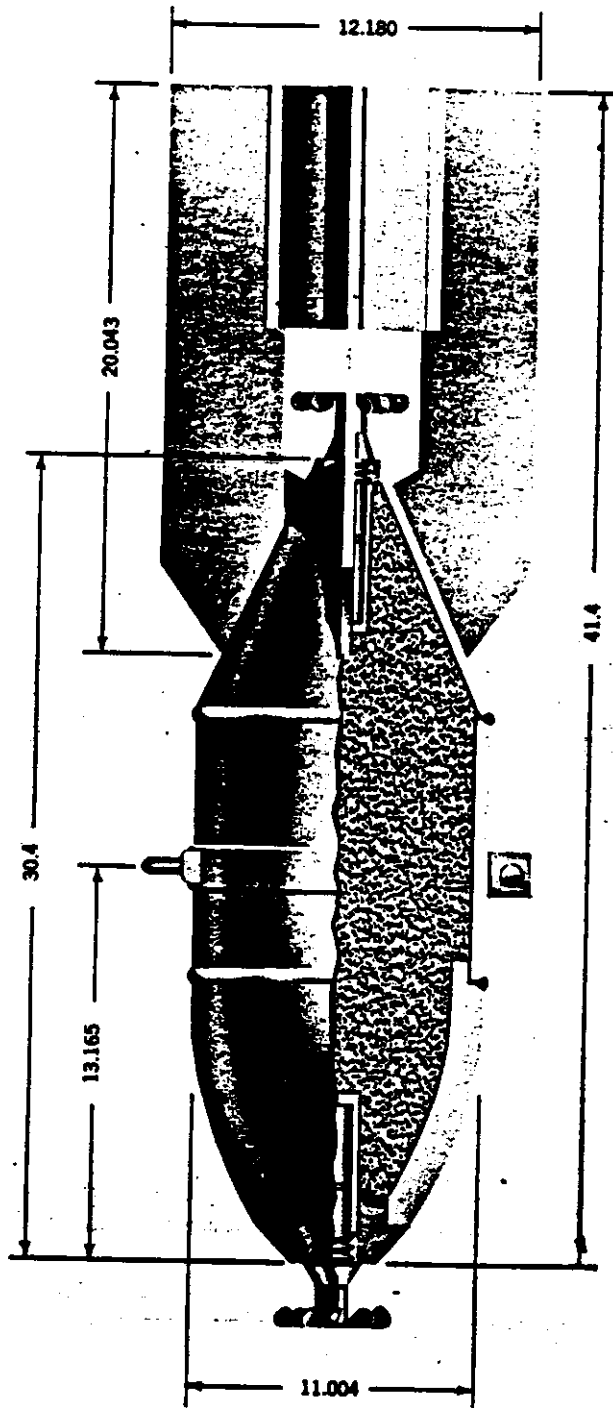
FAB-100 (WELDED) GENERAL PURPOSE BOMB.
